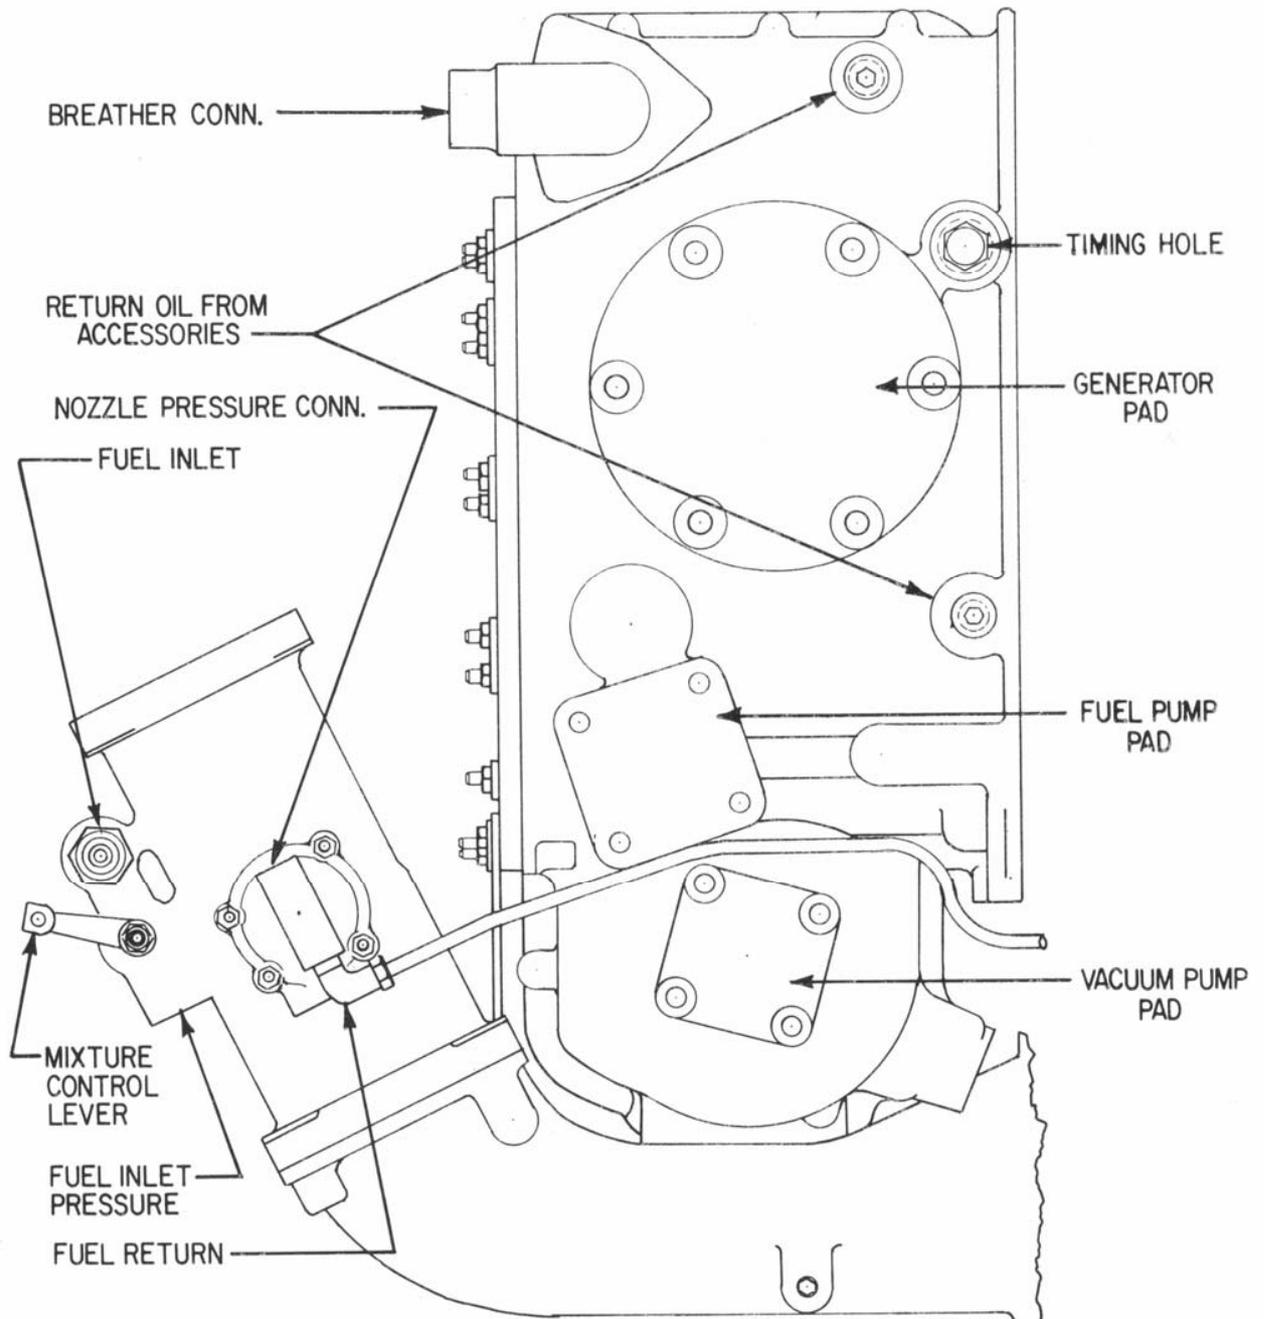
Installation Drawing – Typical IGO-540 Series –
